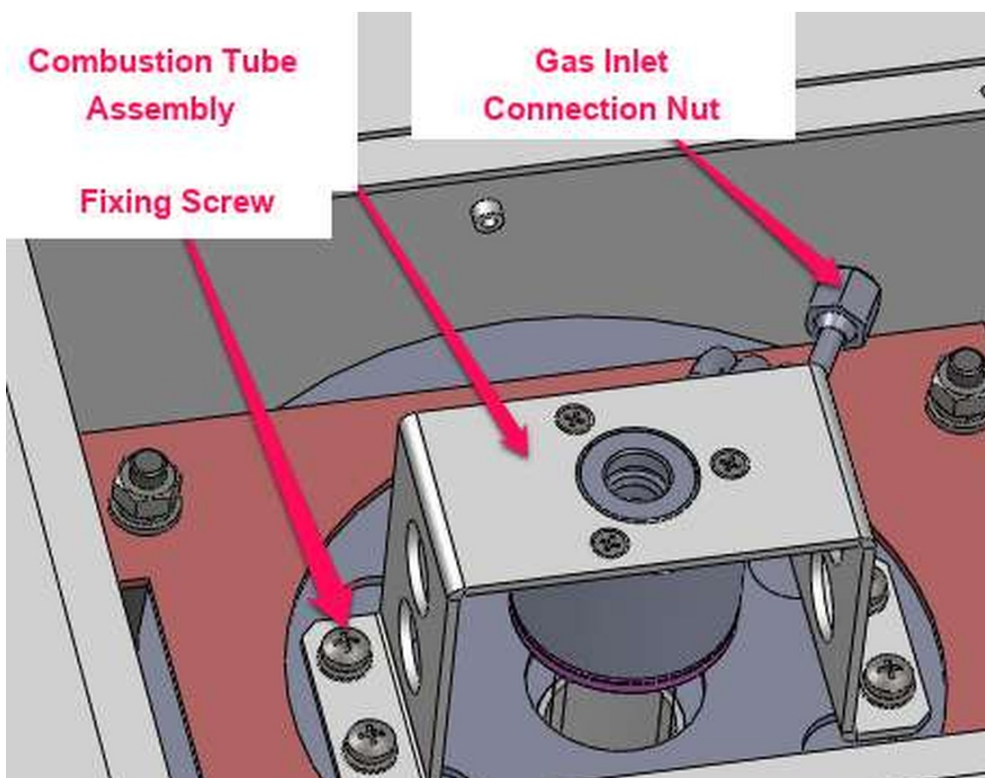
Combustion-tube assembly fixing screws and gas-inlet connection nut.
